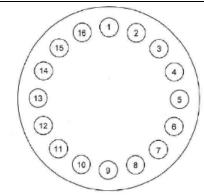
Nozzle 5 Exit Cover Bolt Pattern
